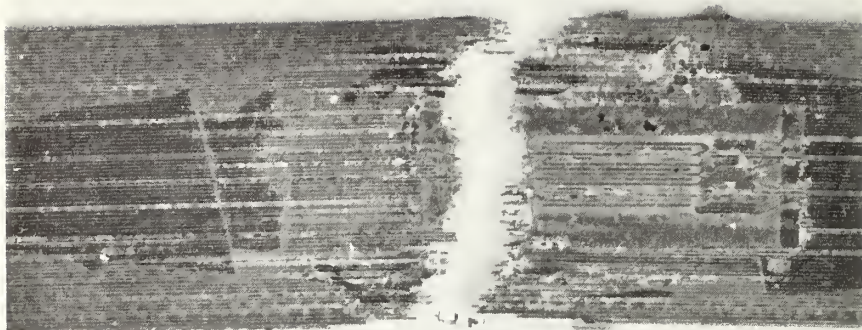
Typical Tensile Fracture in 4-Ply Uniaxial
